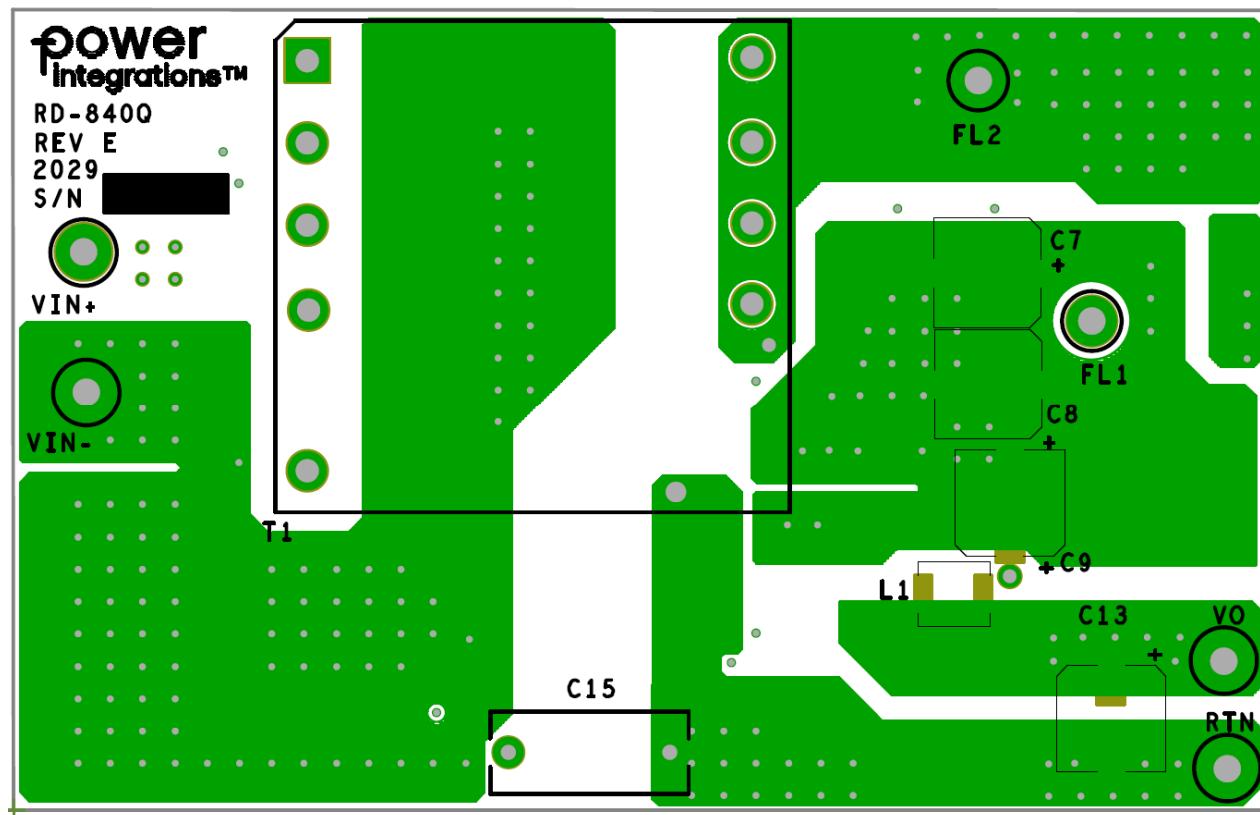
Printed Circuit Board Layout (Internal layer 1).
